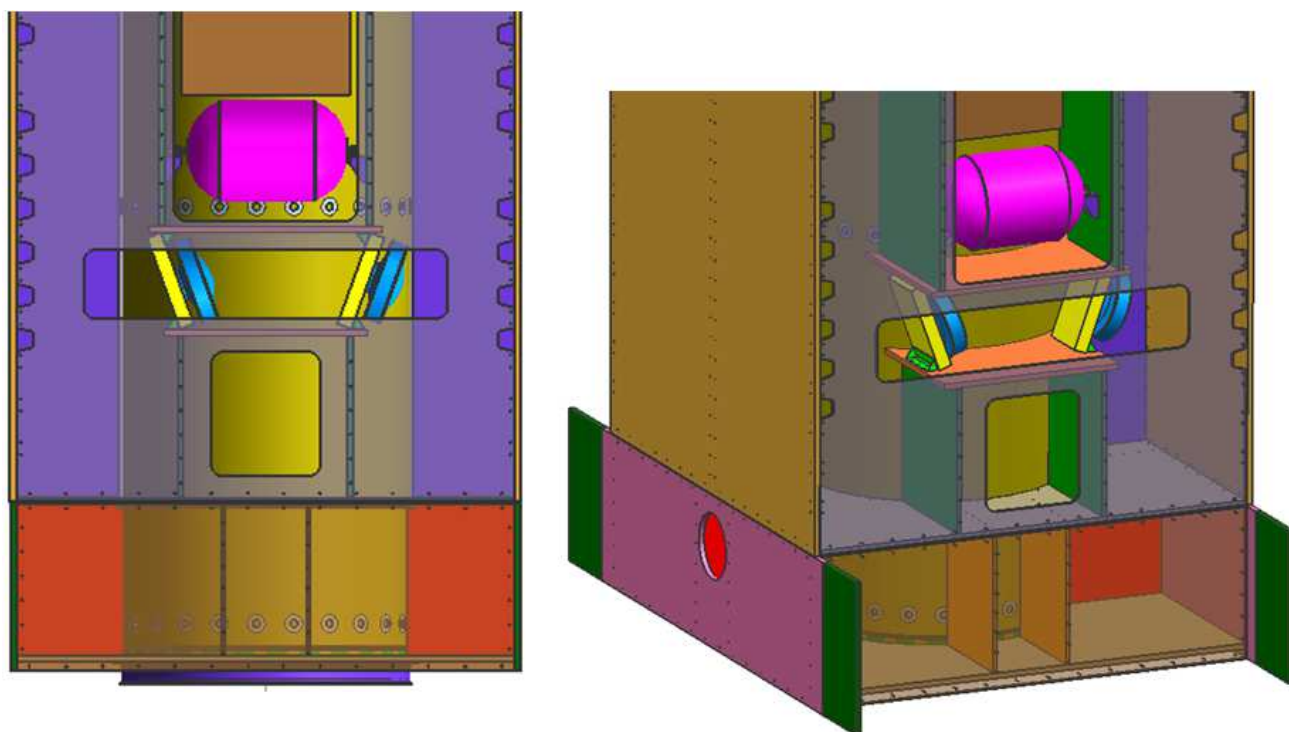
Assembly of momentum wheels & pr. Tank (east view)
